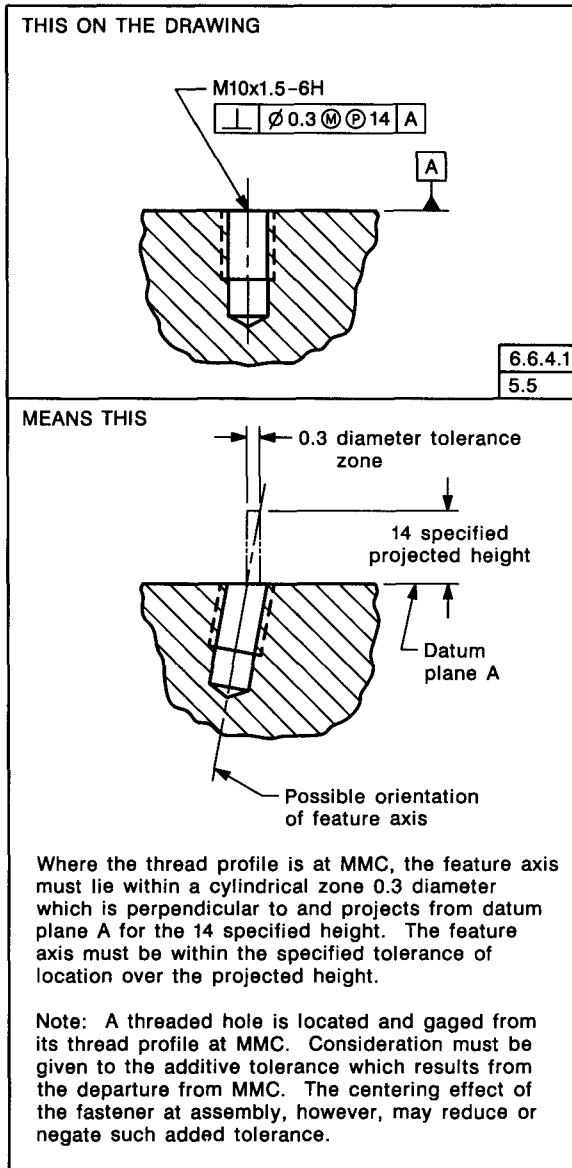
SPECIFYING PERPENDICULARITY FOR AN AXIS AT A PROJECTED HEIGHT (THREADED HOLE OR INSERT AT MMC)
